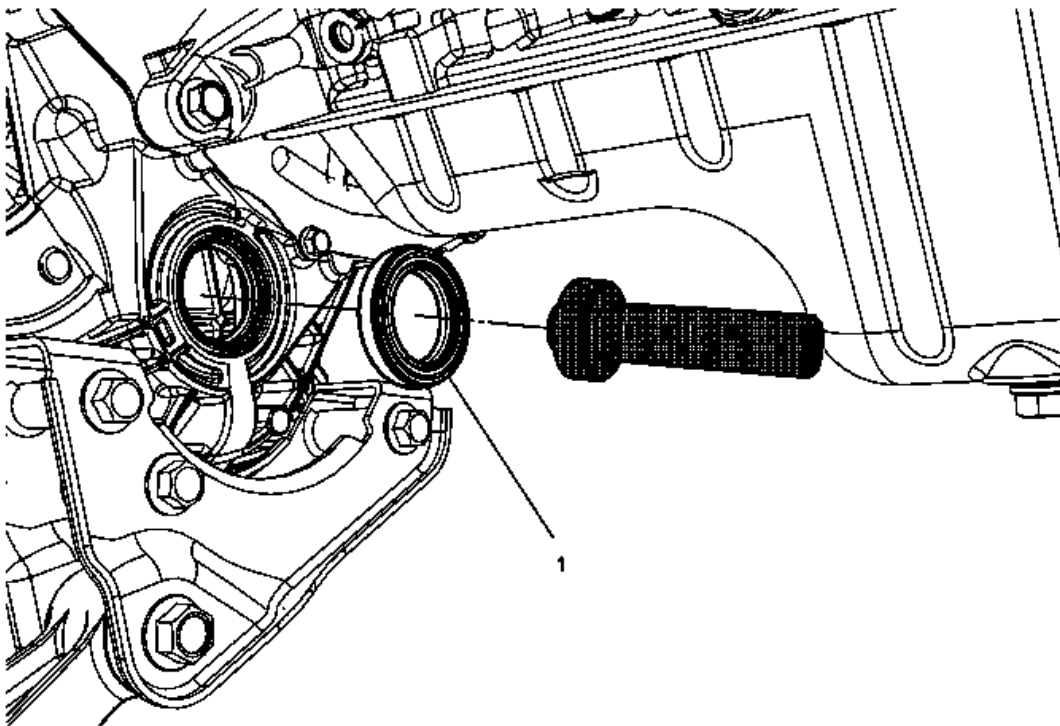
Front Wheel Drive Shaft Seal - Right Side (MX2, MFM)
